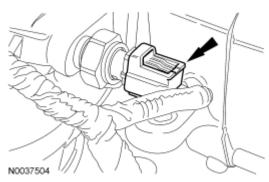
Locating Transaxle Pressure Switch Electrical Connector Courtesy of FORD MOTOR CO.
